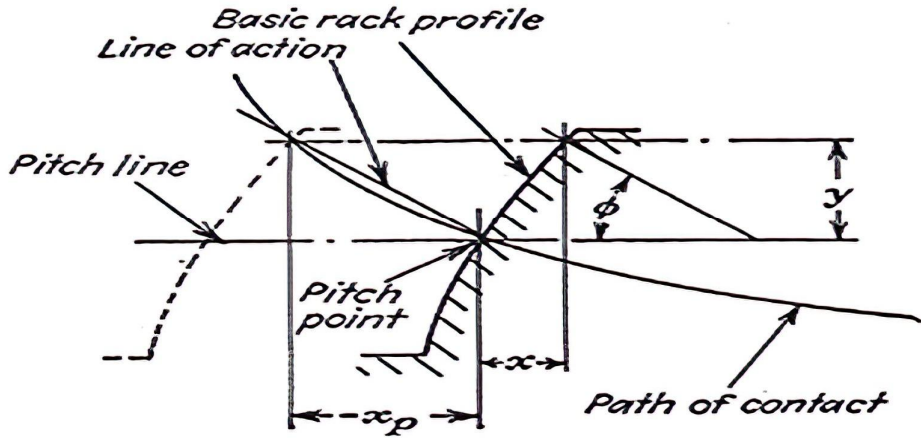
CAD Reverse Engineering Of Modified Rack Geometry
